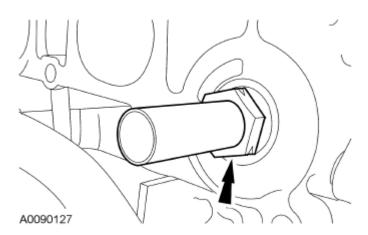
Identifying Exhaust Gas Recirculation Tube Courtesy of FORD MOTOR CO.
